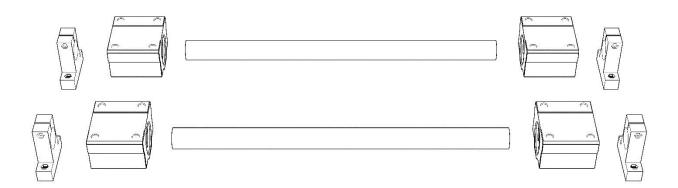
(PUTTING TOGHETER THE PRECISION STEEL RODS, THE LINEAR MOTION BALL BEARINGS AND THE END SUPPORT)
